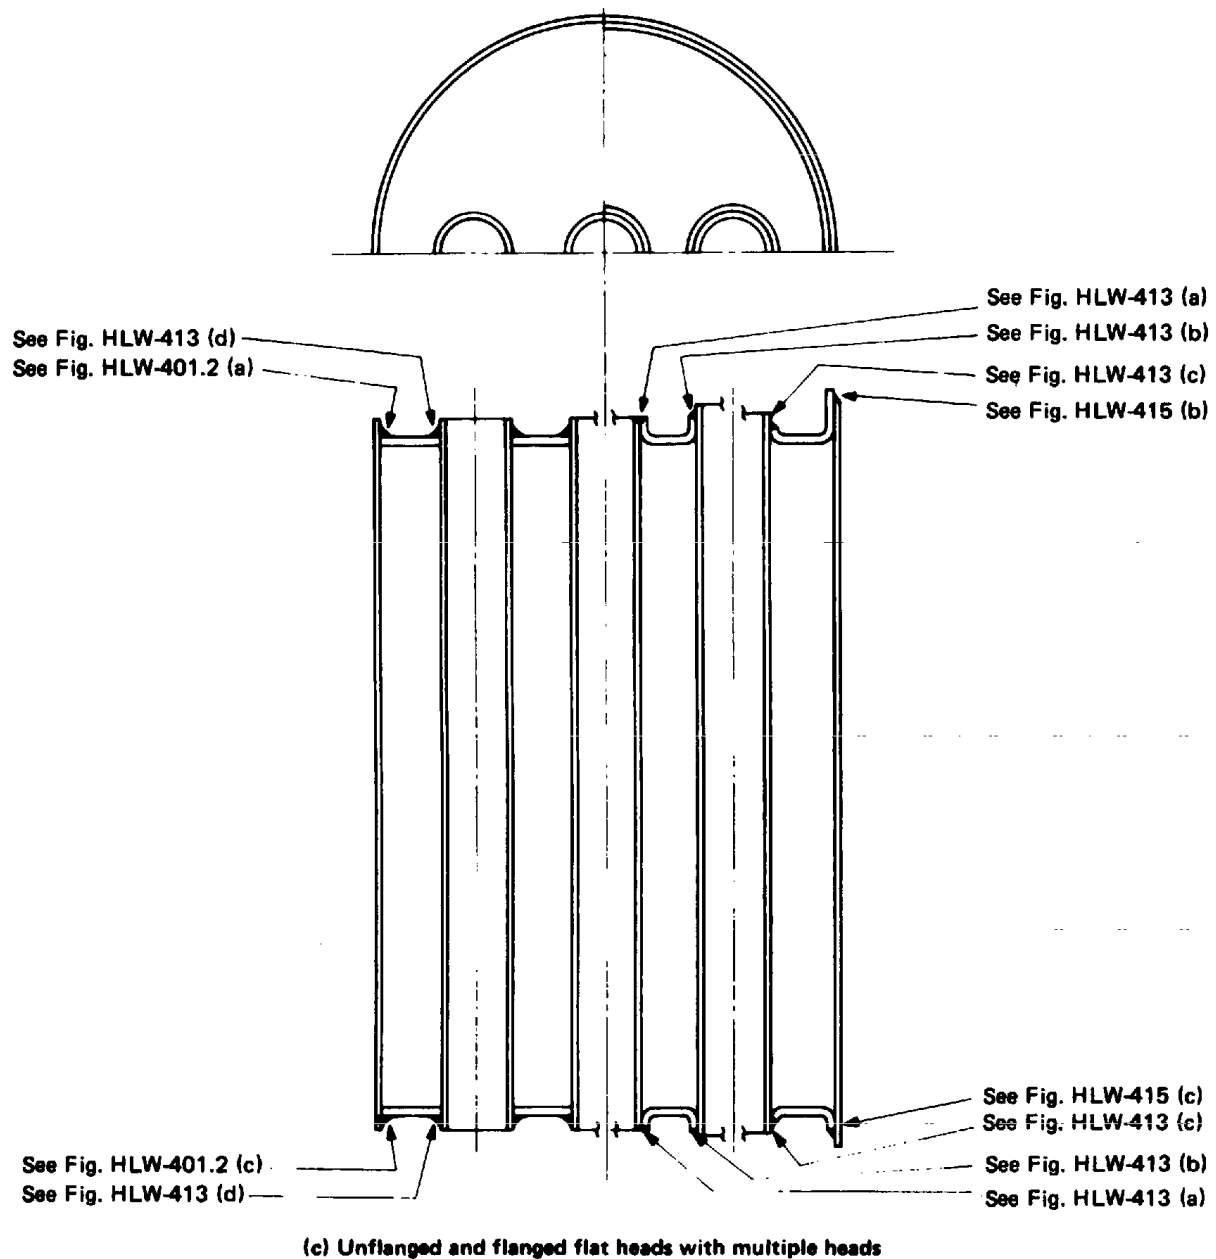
TYPICAL WATER HEATER WELDED JOINTS (CONT'D)
